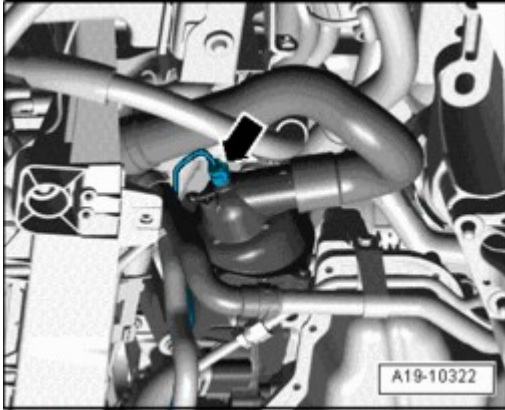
Disconnecting Electrical Connector On Map Controlled Engine Cooling Thermostat F265
